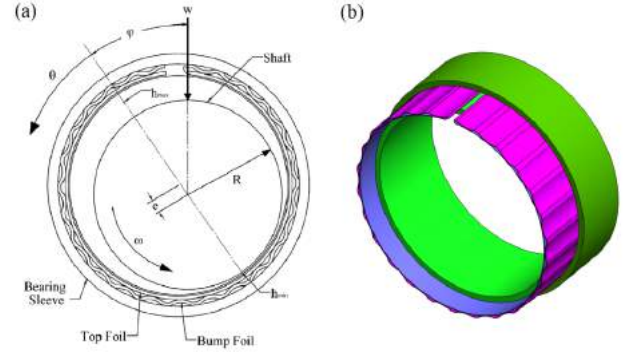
Bump type gas foil bearing: a) schematics of bearing assembly, b) isometric view of 3D model
